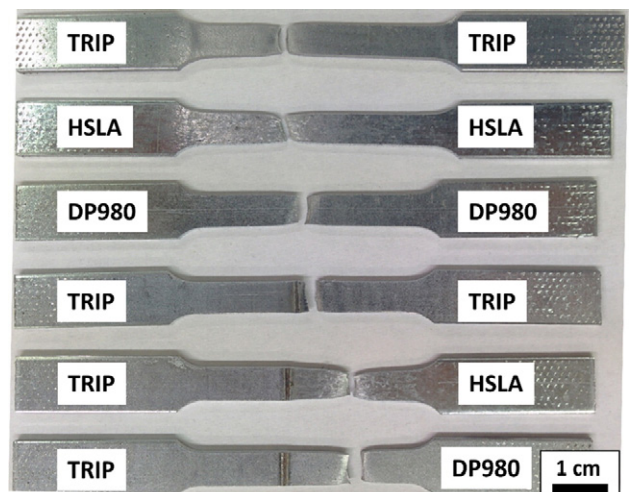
Typical tensile failure locations for BM and laser welded joints.
